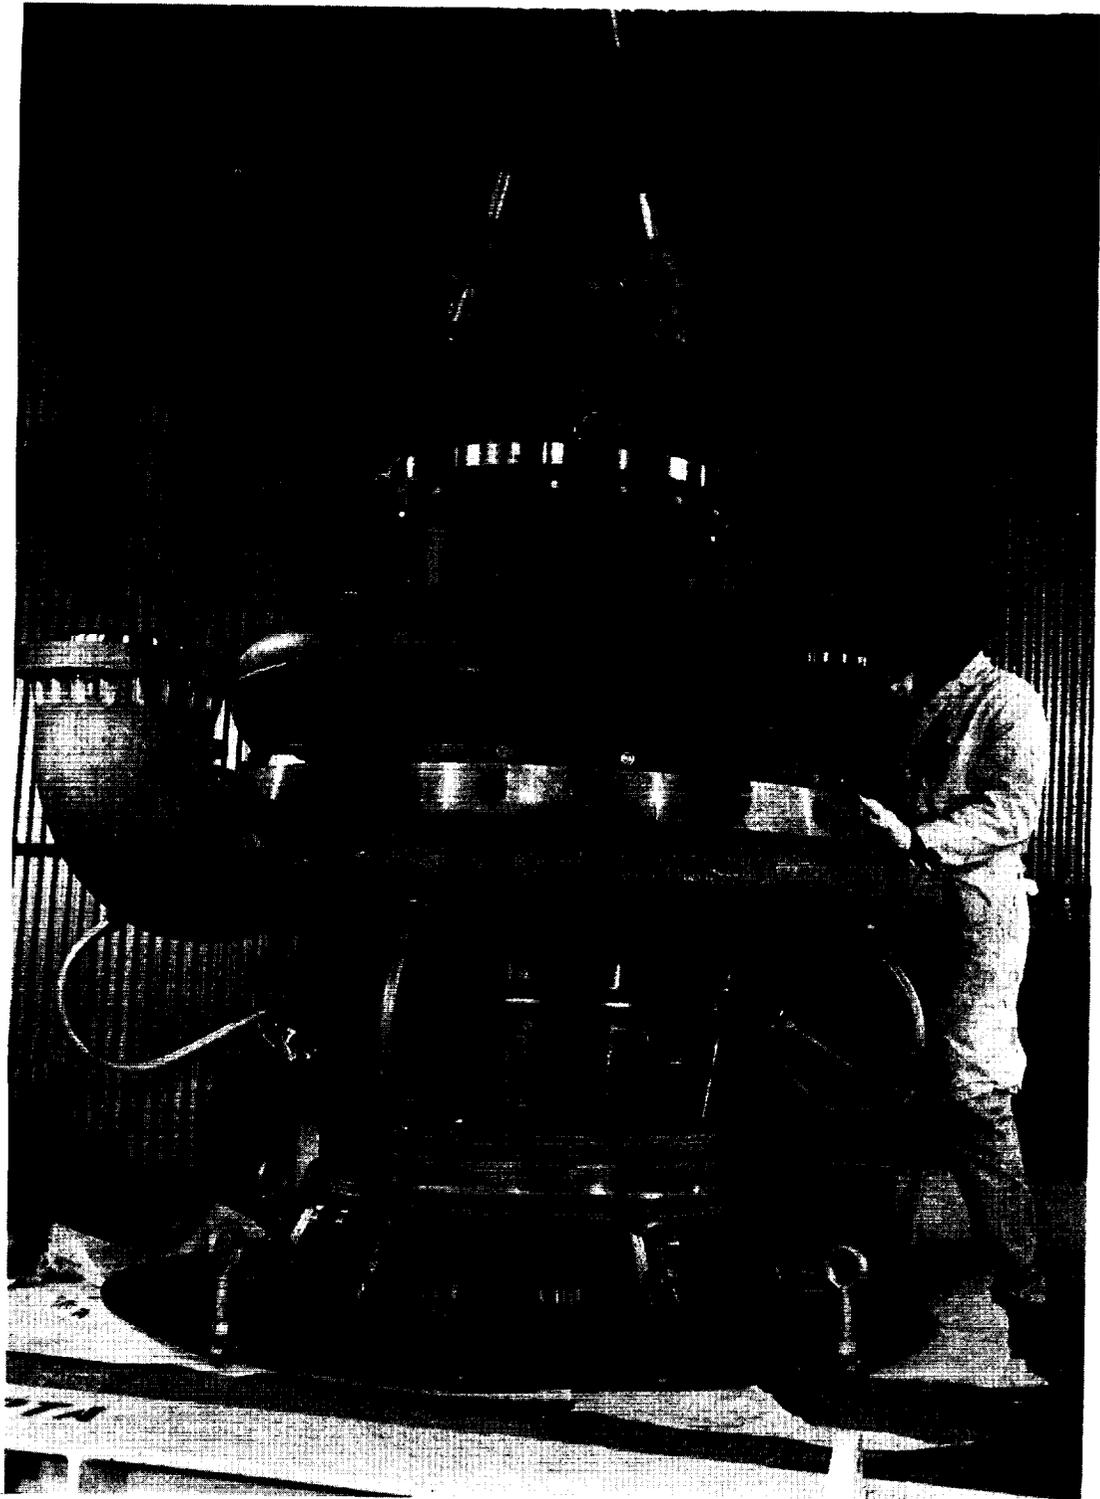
M-1 Uncooled Thrust Chamber Assembly
